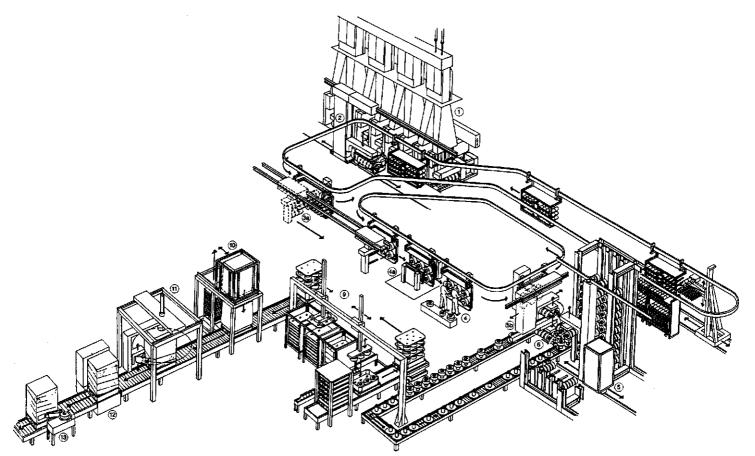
Complete transport and packing system for POY packages [4]. (1) POY spinning machine. First transport loop: transport of empty paper tubes to the spinning machine; (2) doffing as per Fig. 6.3; transfer of packages (3a) to inspection (4a) and sorting (4). Transfer and transport (6) to intermediate storage (5) or to automatic packing on pallets (9); fitting a carton (10), baling (10), (11), weighing (12) and identification for despatch (13)
